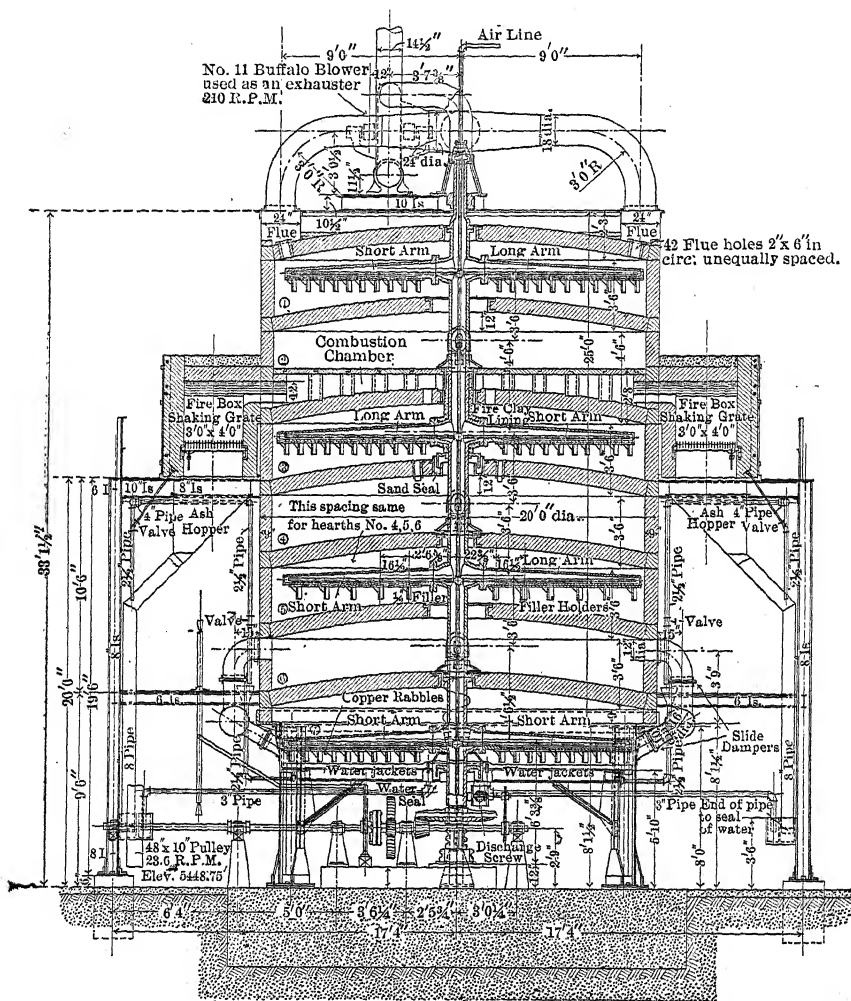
SECTIONAL ELEVATION OF 20-FT. ROASTING FURNACE.
